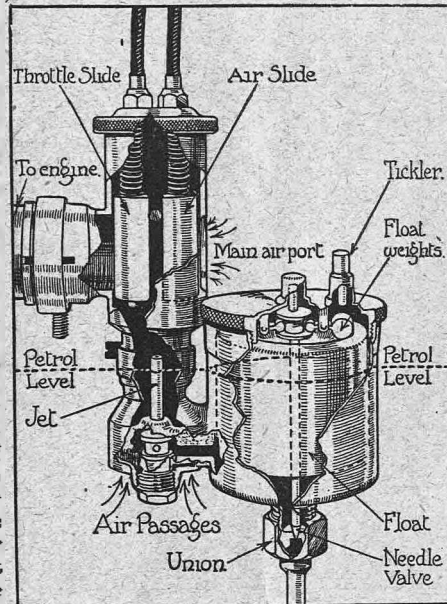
Sectional view of a carburettor (a two-lever B. and B.).
